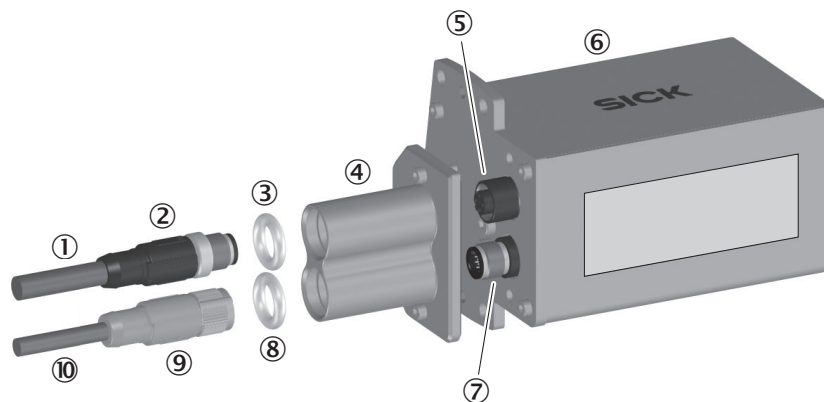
Assembly of IP69K protective housing, with use of the Ethernet connection
